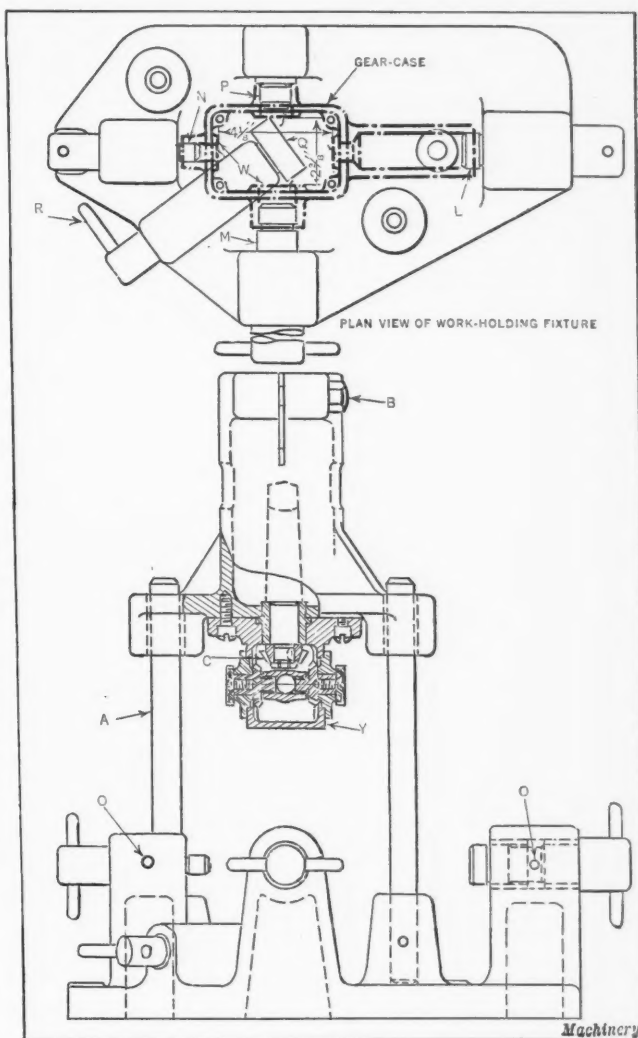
Work-holding Fixture and Milling Head Used on Drill Press
